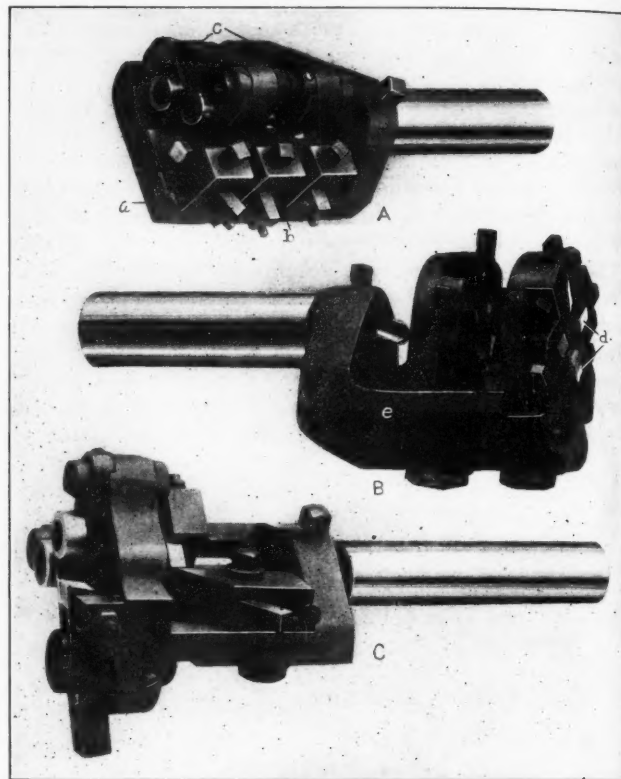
Multiple Turning Tool, Adjustable Hollow Mill and Standard Three-tool Box-mill
